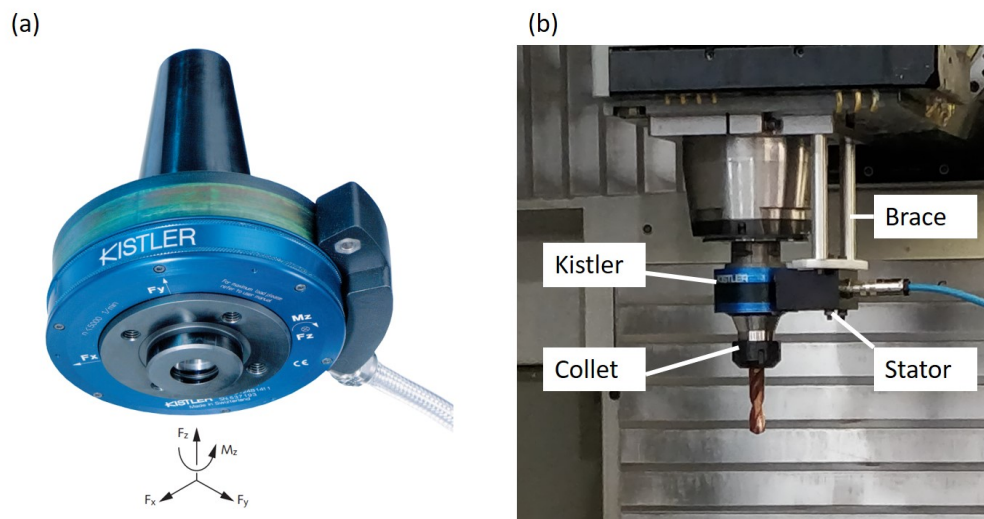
(a) - The Kistler dynamometer and axes of measured forces. (b) - The Kistler dynamometer, stator and collet setup, braced within a DMU monoBLOCK 100 machining centre.
